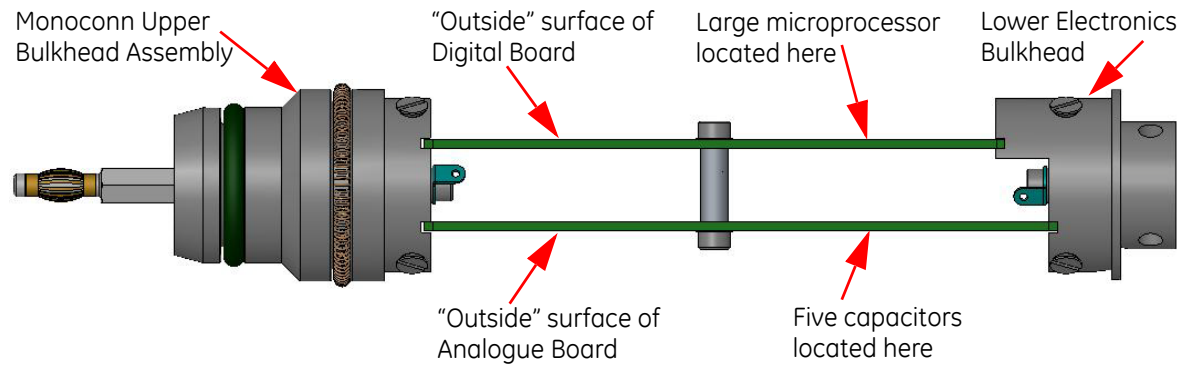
Identification of “outside” of the PCB Assemblies in the In-Line Electronics Chassis Assembly
